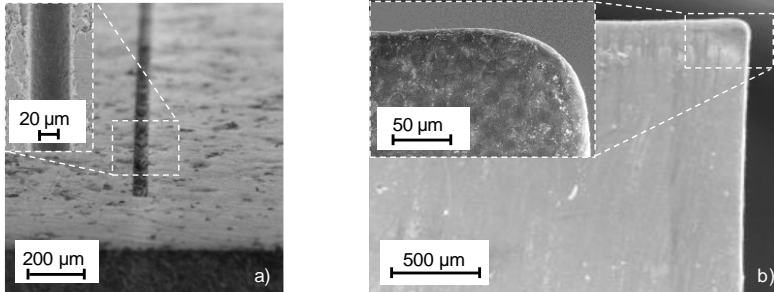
a) Top view of a micro cavity and b) side view of a boron doped diamond foil after machining
